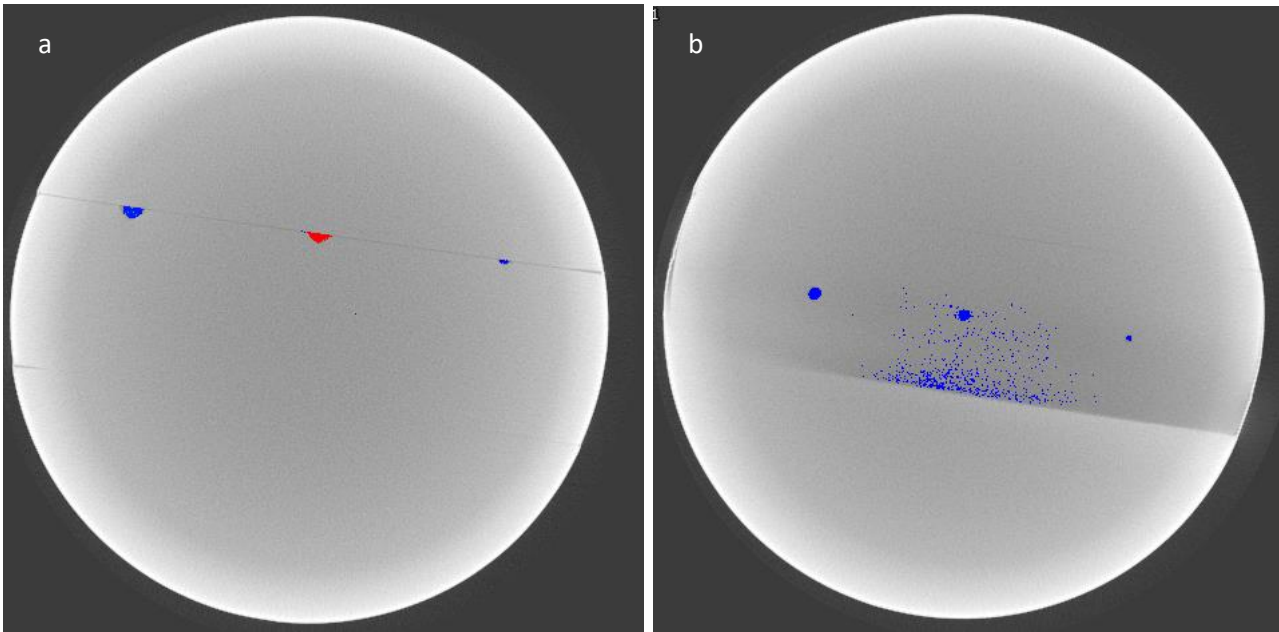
XCT top view image of the upper section with 3 holes b) XCT top view image of the lower section with 3 holes
